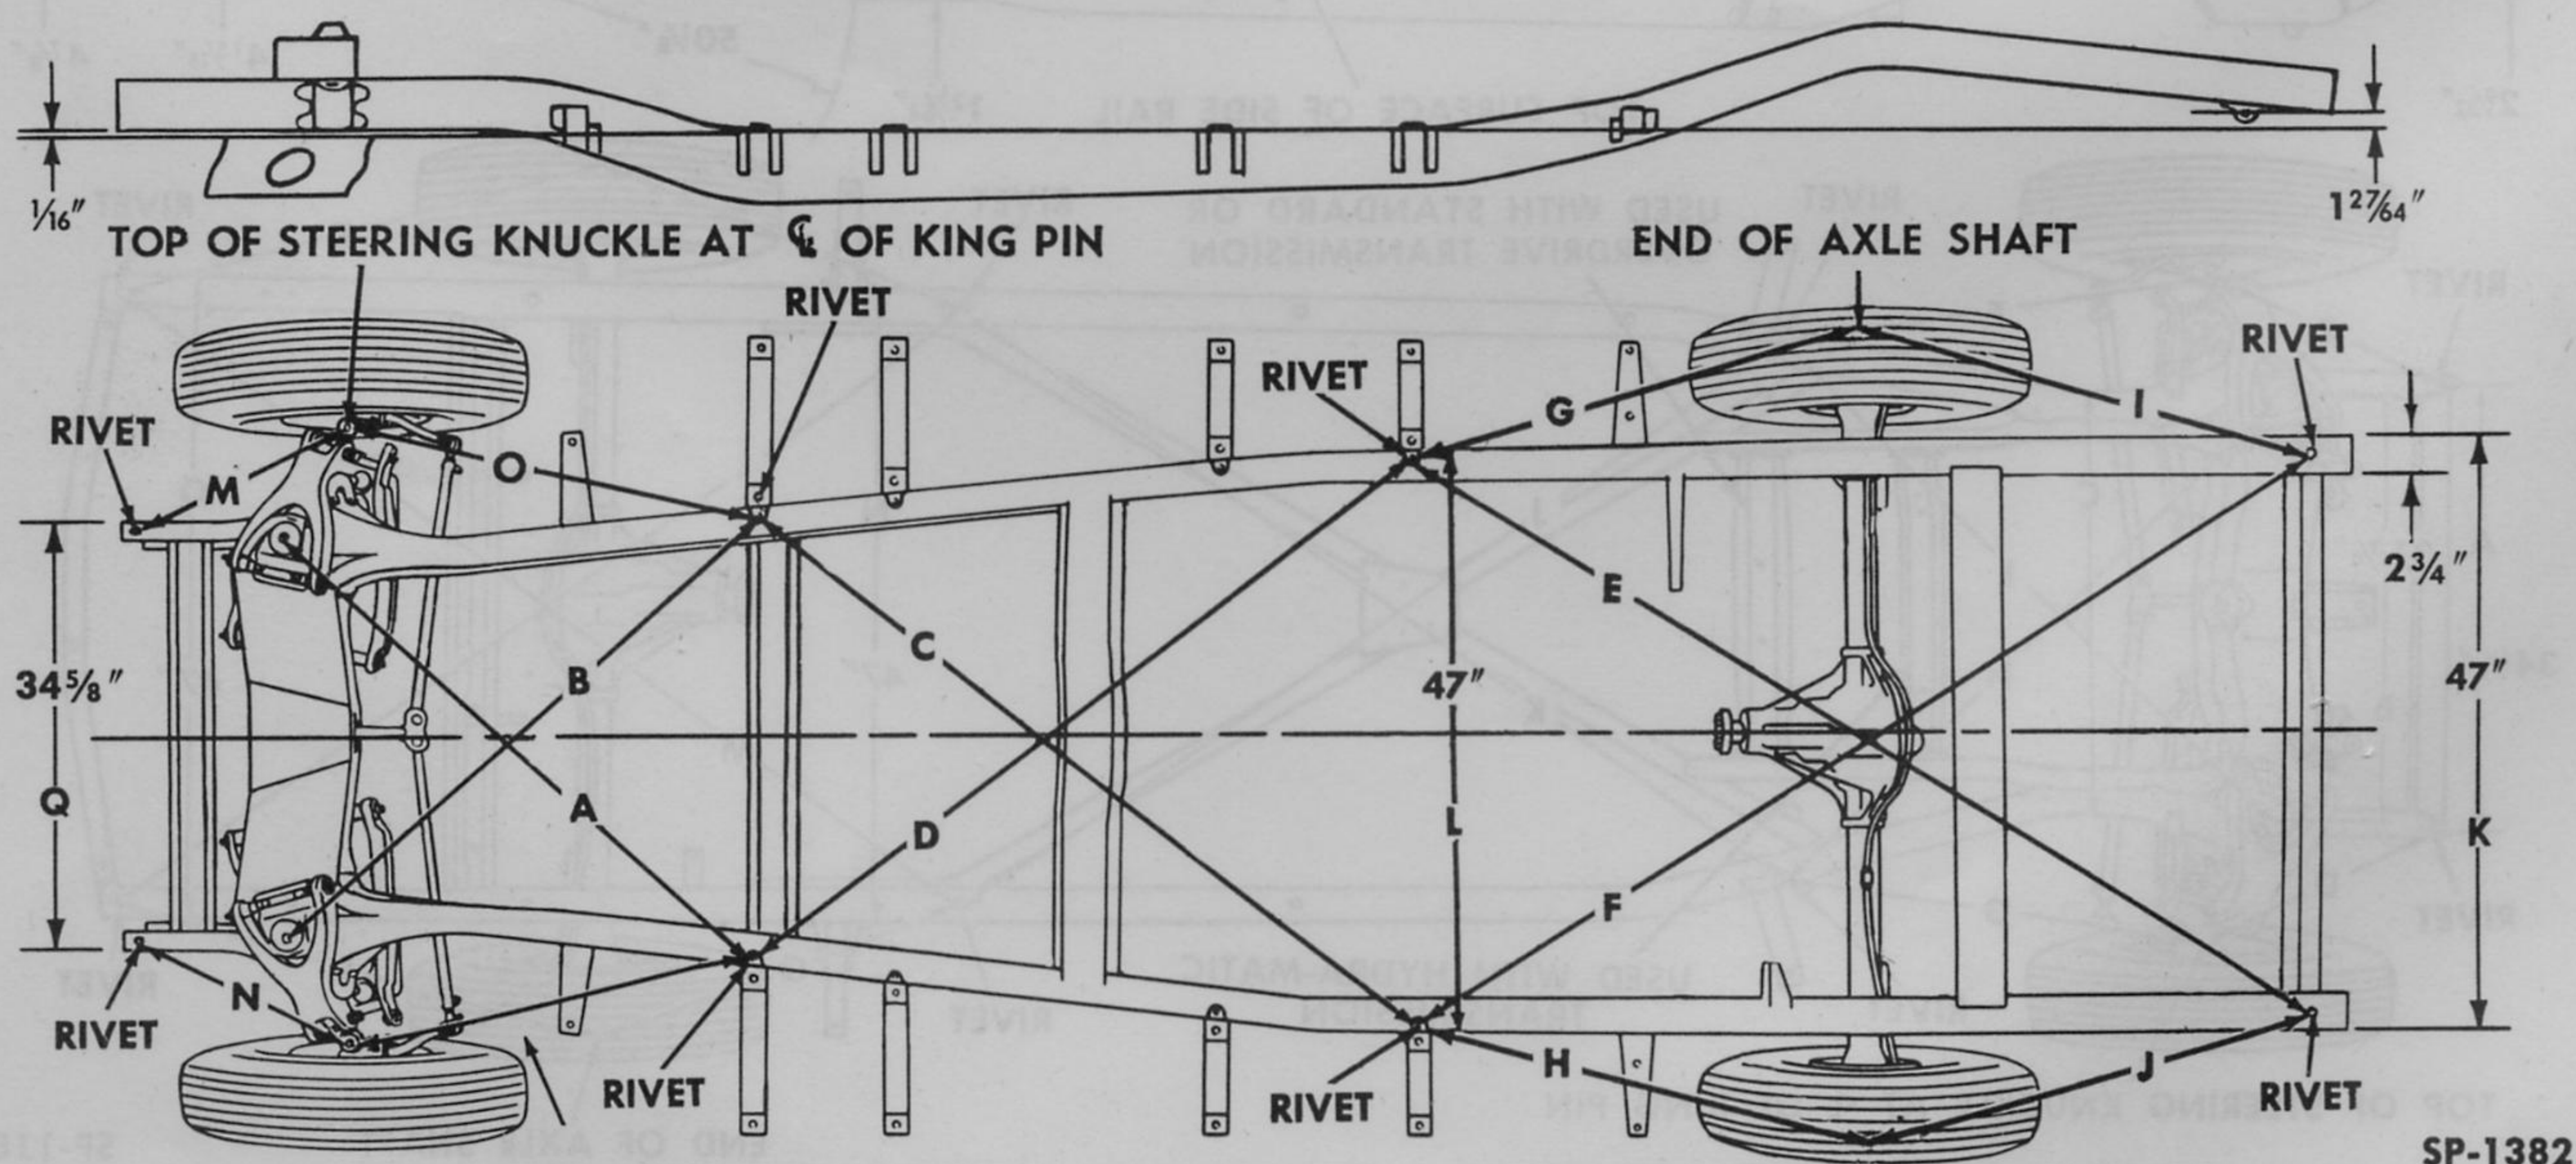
Typical Frame, Front Suspension and Rear Axle Alignment Diagram—Frazer
